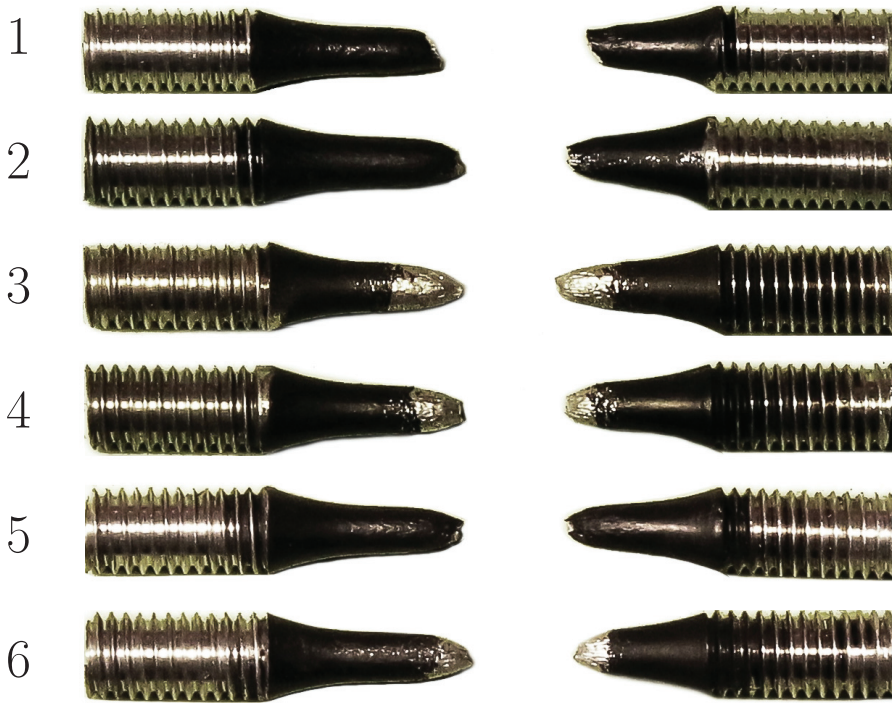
Tensile specimens post-fracture for AA6060-H from all SHTB tests
